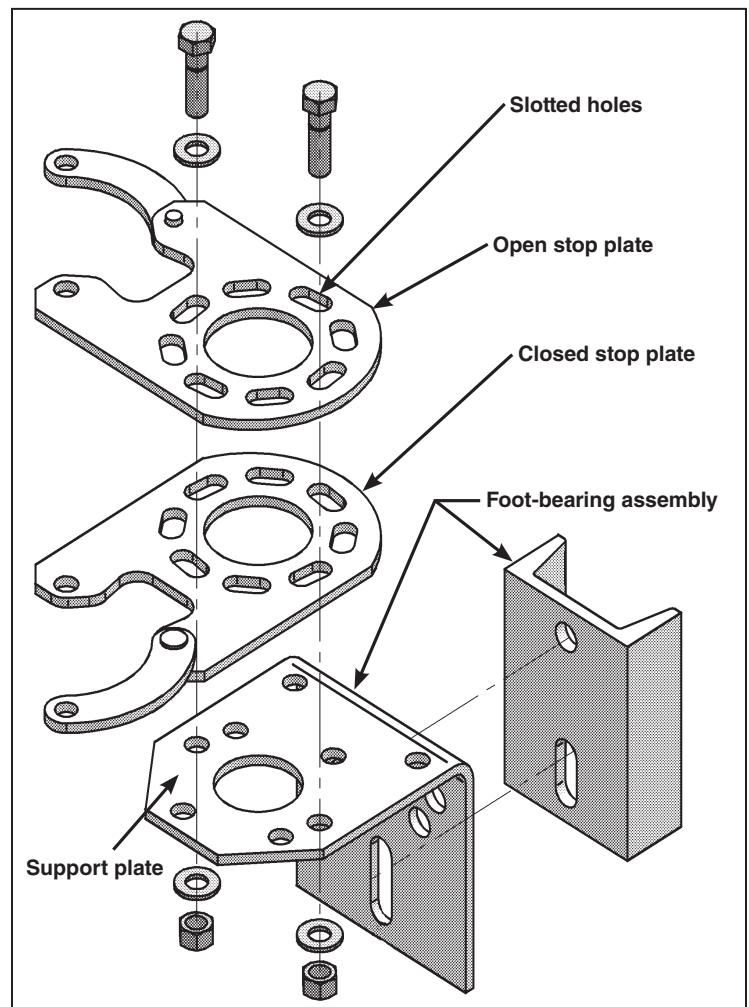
An exploded view of the stop plates and foot-bearing assembly.
